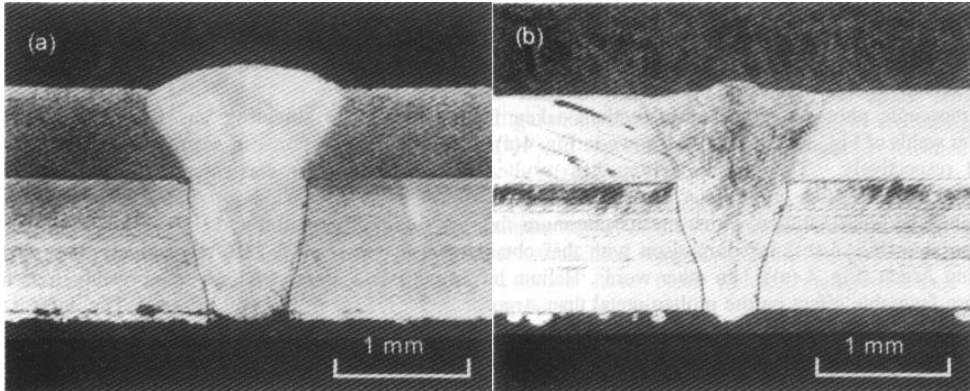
Low magnification stereoscopic photographs of cross sections taken from laser welds of Figure 14
